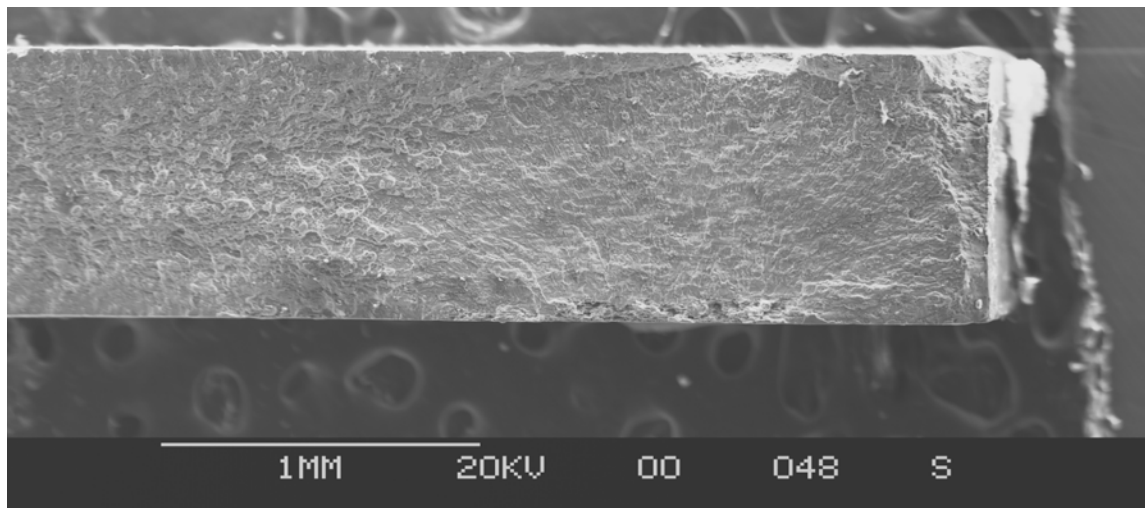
Crack on Fracture Surface of Specimen 5880.
